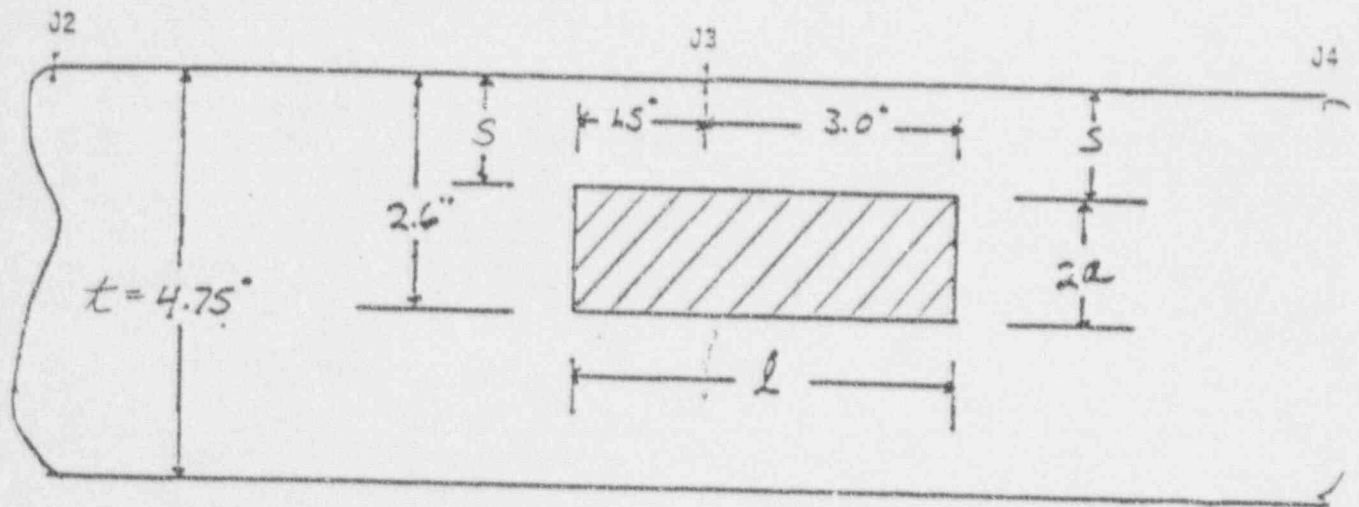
Byron-Jackson Reactor Coolant Pump Weld and Base Material Thickness with Upper Scroll Weld Flaw Indication - ANO-1 "B" RCF - 1988 UT Exam
